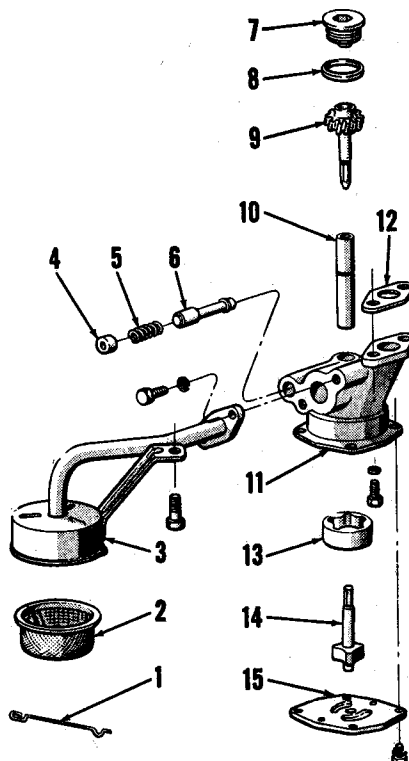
Exploded view of oil pump assembly, suction (inlet) screen and oil pump drive gear for all models except TW-10, TW-20 and TW-30. Stop (7) and drive gear (9) are removed from above as shown in Fig. 85.
